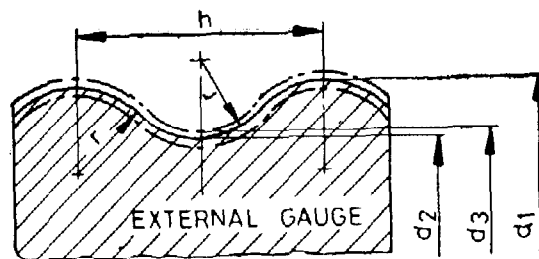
EXTERNAL GAUGE FOR INTERNAL THREAD
